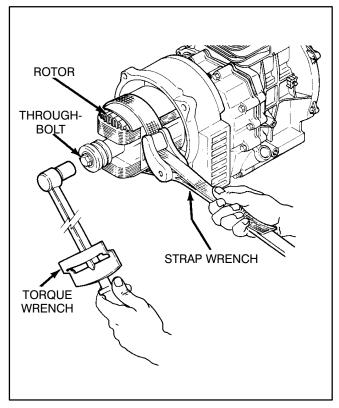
SECURING ROTOR FOR INSTALLATION
